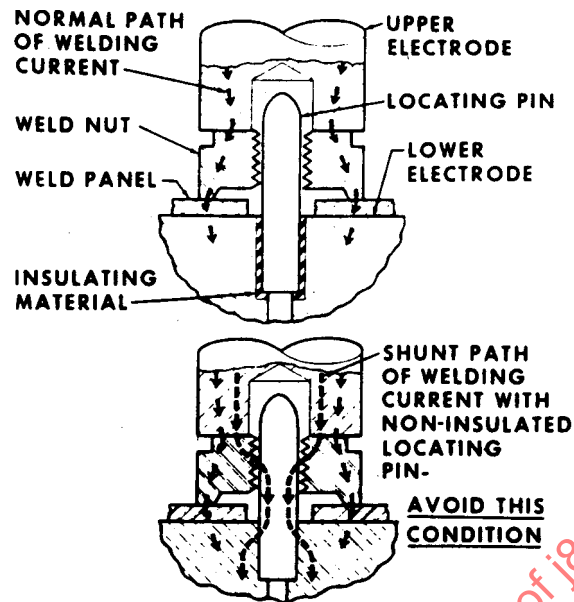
C—PROJECTION WELD NUT SETUP
